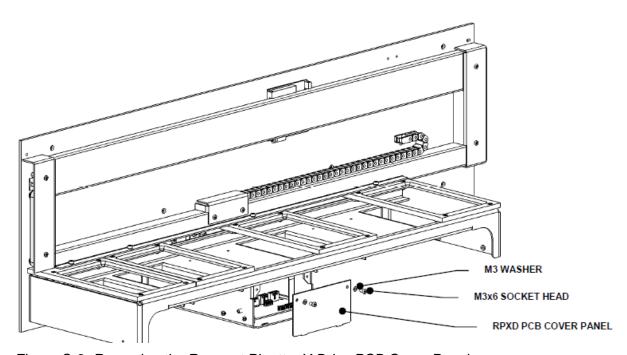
Removing the Reagent Pipettor X Drive PCB Cover Panel
